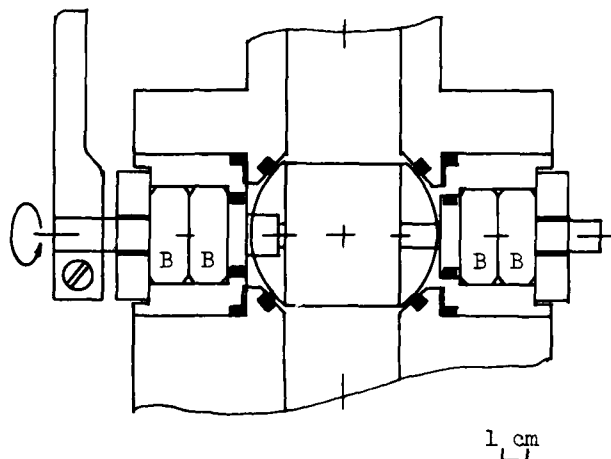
An exploded view of the fast acting ball valve. B denotes ball bearing sleeves for the shafts supporting the valve ball.
